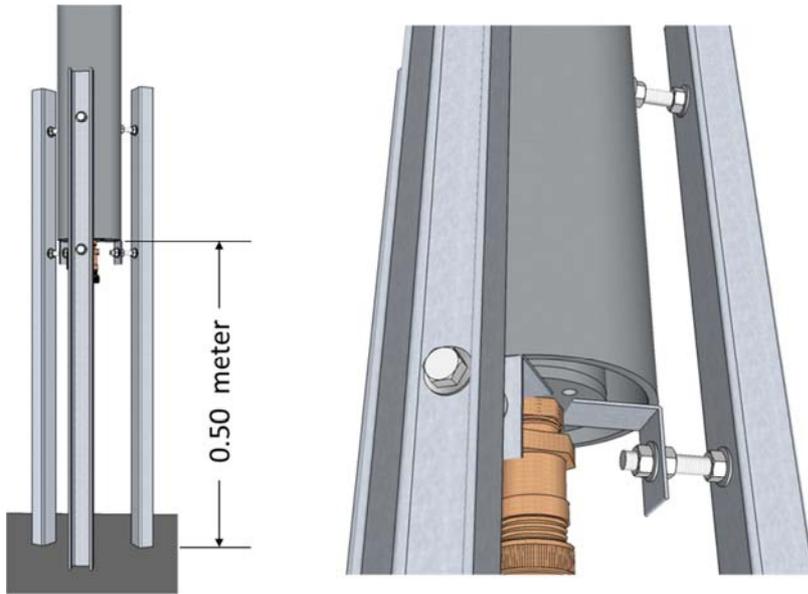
Fixation of ignition system, temperature switch and cables to mixing tube and burner head
